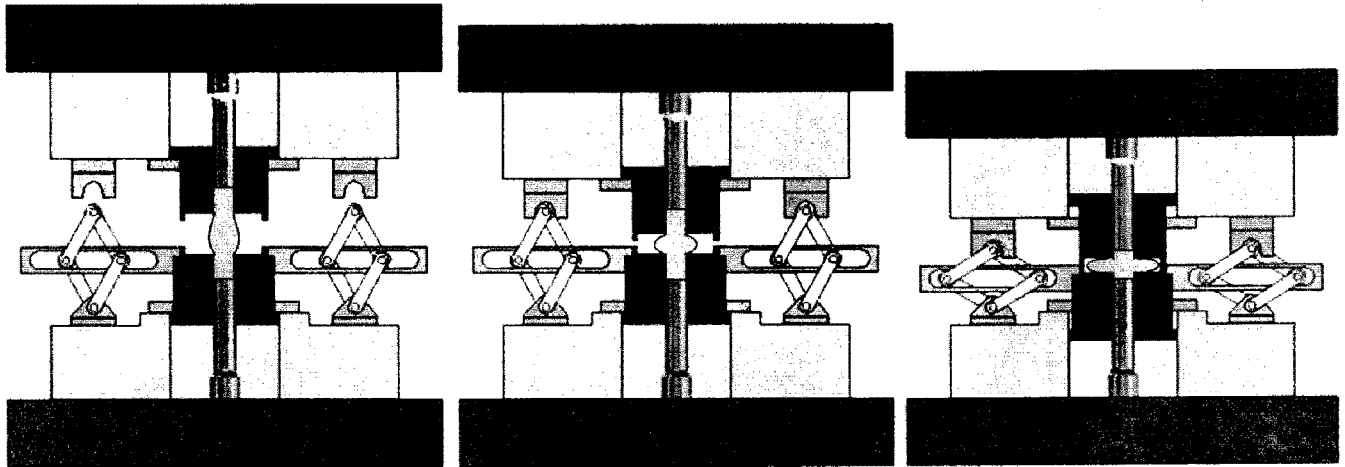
Operation of the enclosed die forging die set from the top to the bottom
